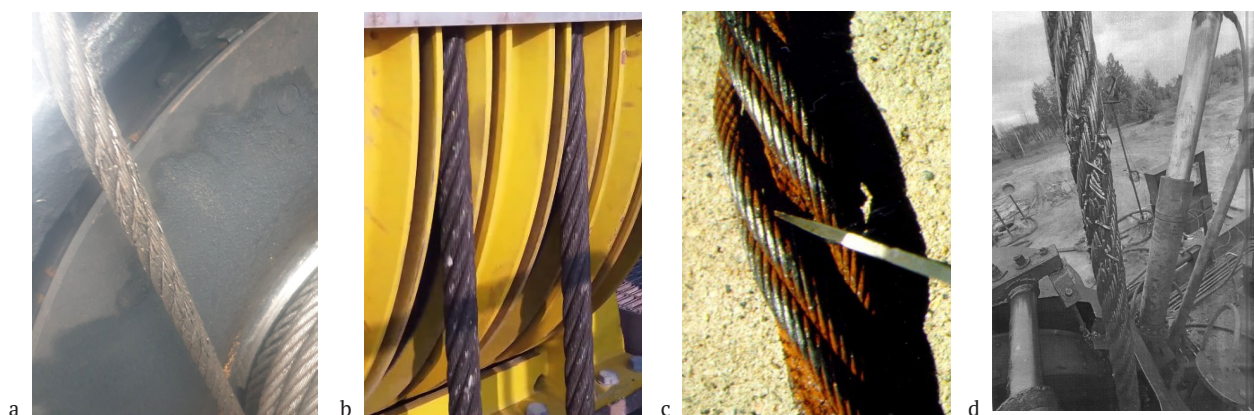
Appearance of the drilling line with signs of fretting and corrosion damage and destruction of the wires of the drilling line of the UPA-60X unit
